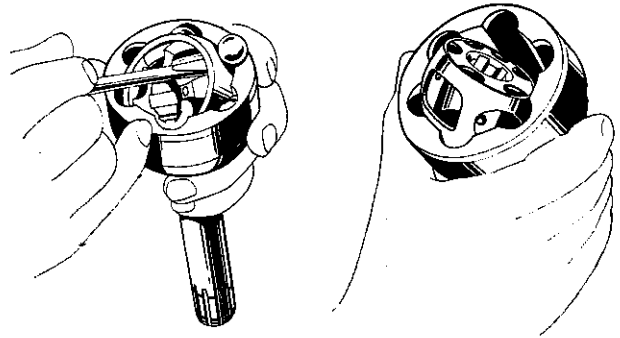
DISMANTLING RZEPPA JOINT 10611
